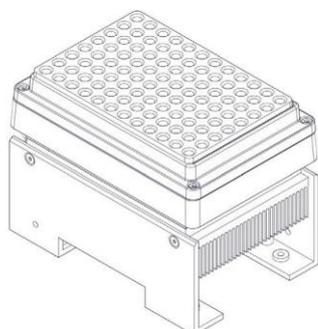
PCR-Adapter placed on CPAC with mounting frame.
